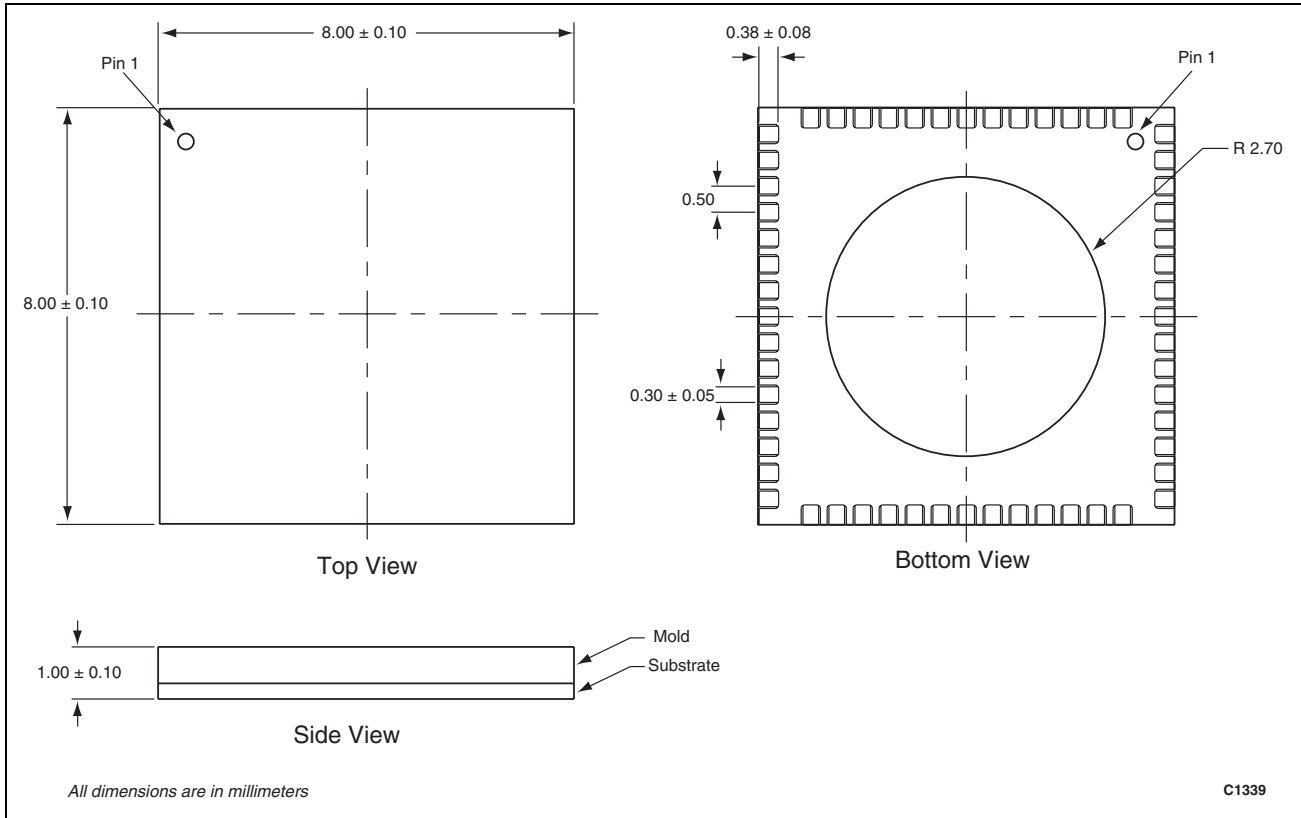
CX74063-26 56-Pin RFLGA Package Dimension Drawing
